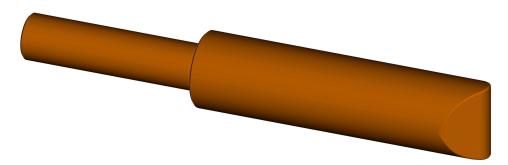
Pro/E assembly model 4105091012-101204, iso view
